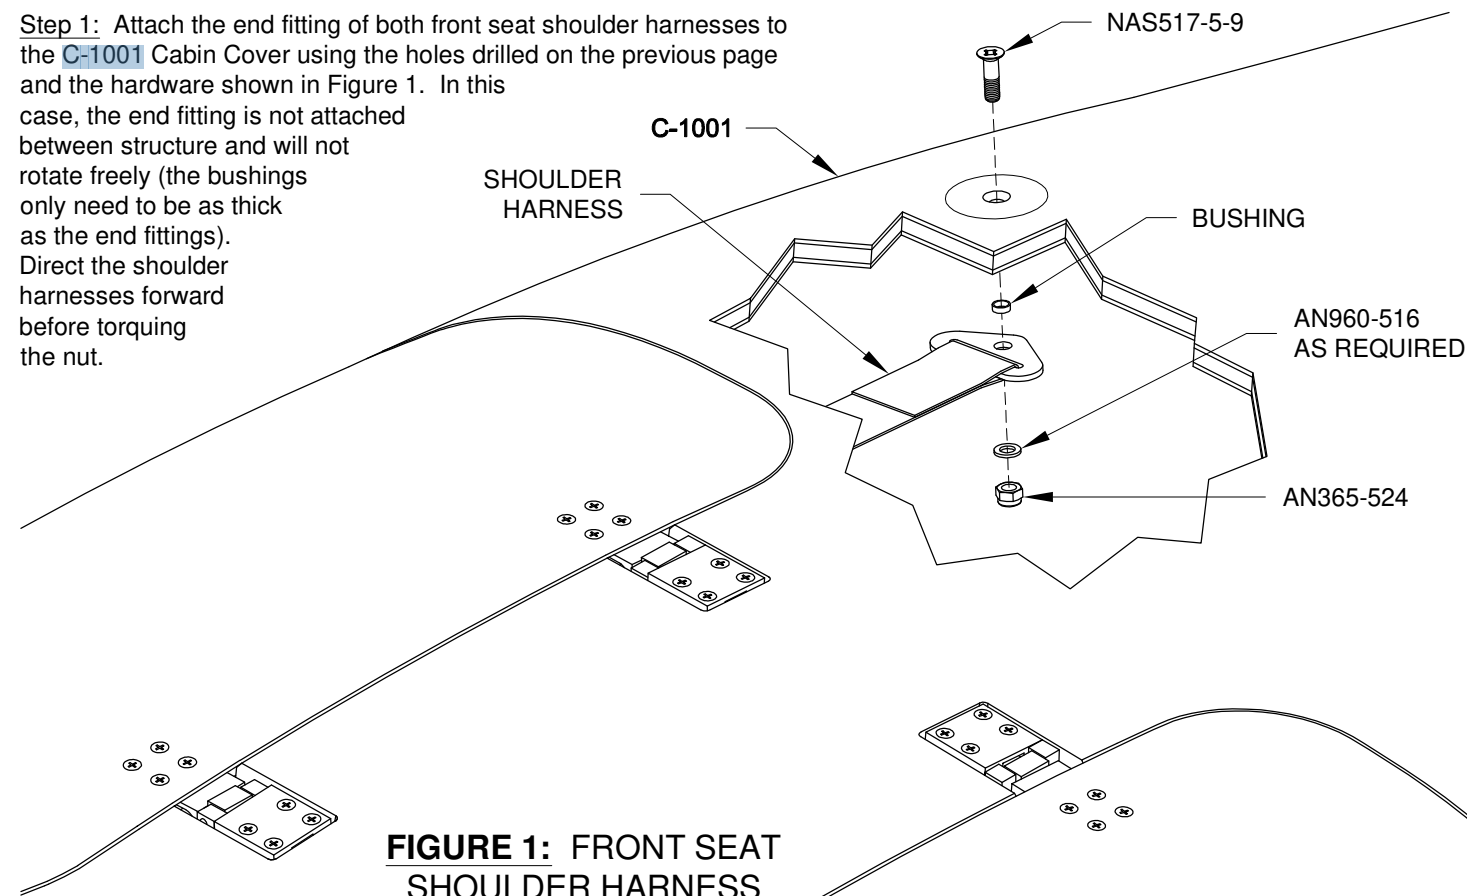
FRONT SEAT SHOULDER HARNESS
